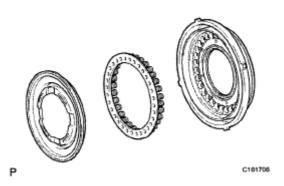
Identifying No. 2 Clutch Balancer And Direct Clutch Return Spring Sub-Assembly
